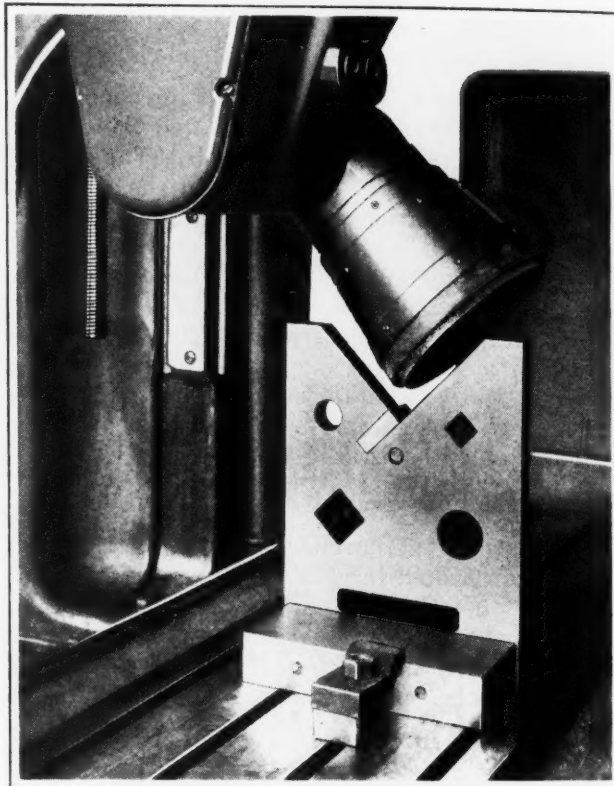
Wheel-head Shown in Fig. 1, Used for Grinding Both Sides of a Vee at One Setting
